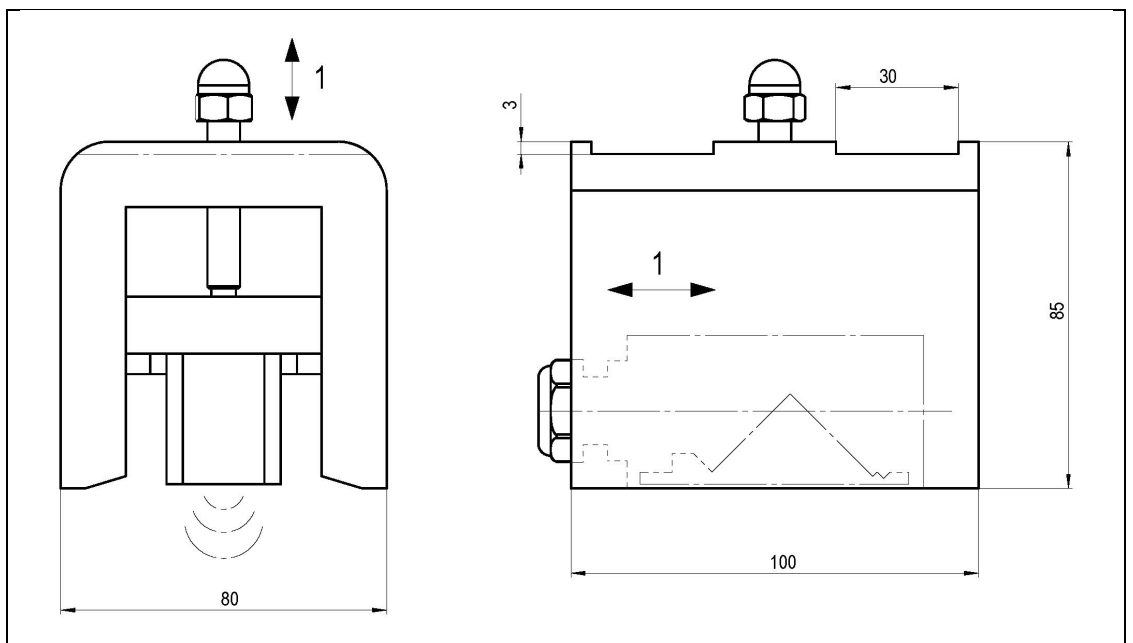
Dimensions wedge sensor, type NIS-V280KS
